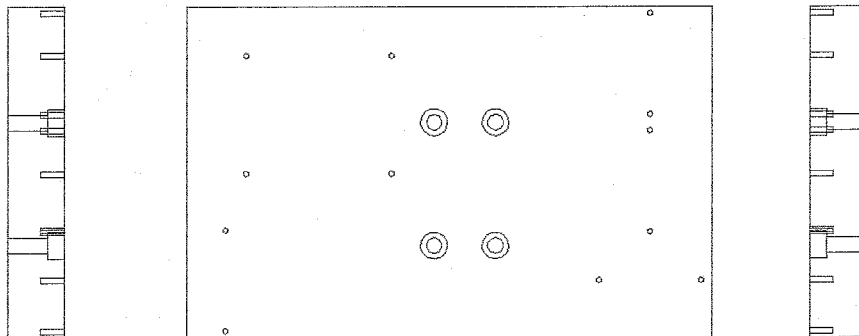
Aluminum mounting block for optical components axis 3 & 4
